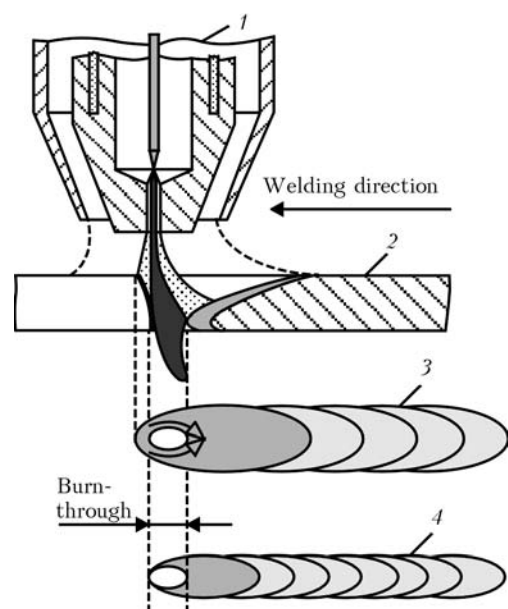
Block diagram of PAW in «keyhole» mode (ISF Aachen scheme) [22]: 1 — plasma torch; 2 — weld; 3 — weld surface; 4 — weld root
